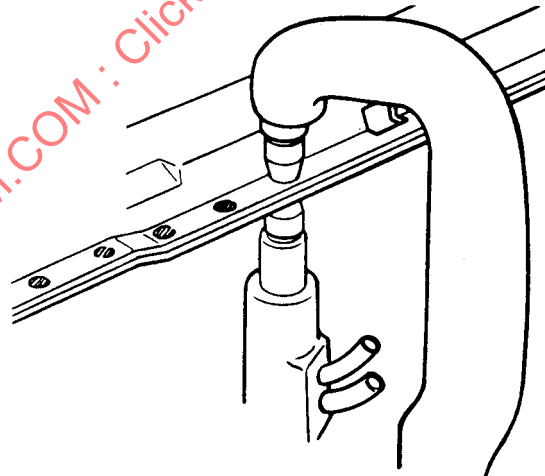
PORTABLE RESISTANCE WELD GUN
